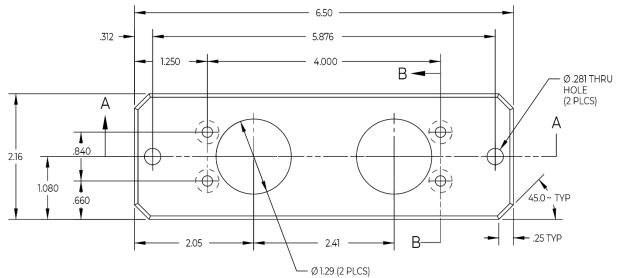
BOTTOM OR SIDE MOUNTING PLATE DIMENSIONAL DRAWING
